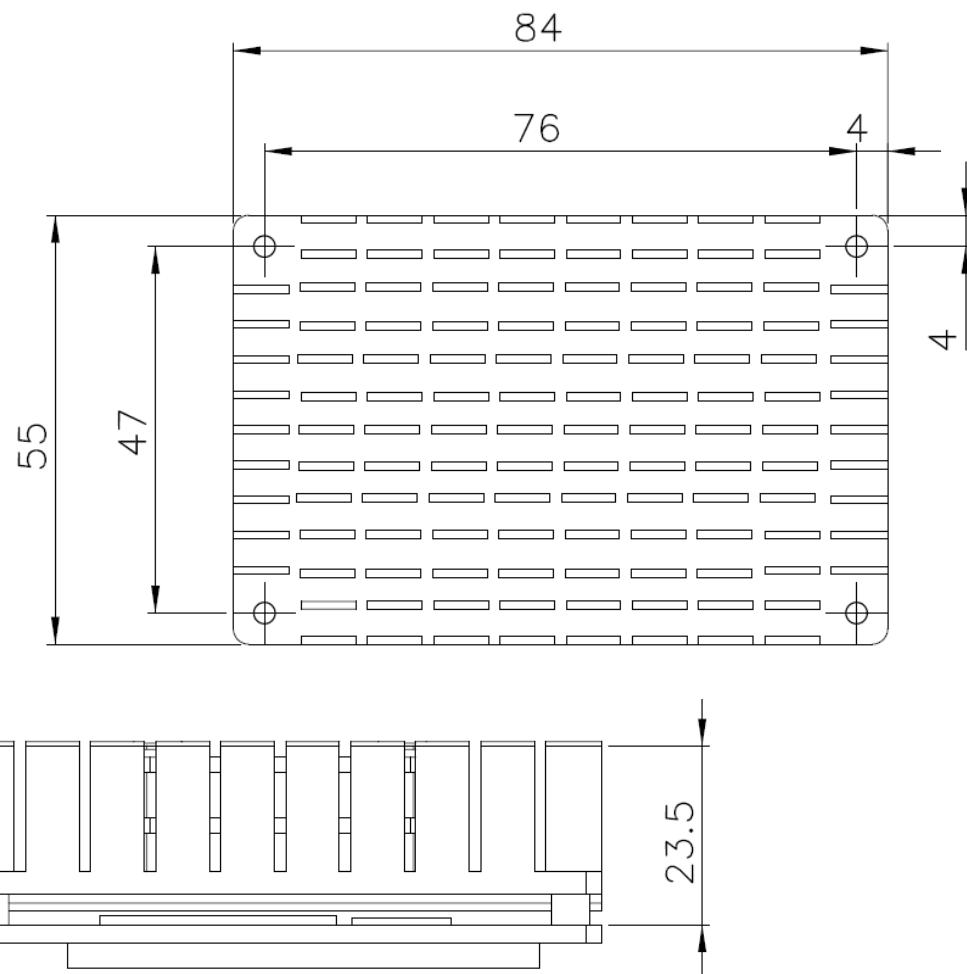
ICE-BT-T10 Heatsink Dimensions (mm)
